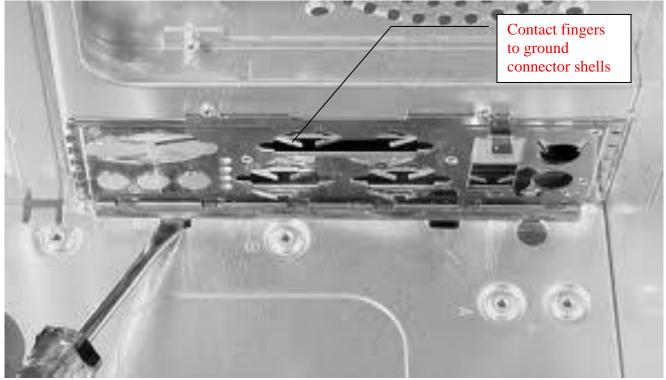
I/O Panel Interface providing chassis grounding tabs to shielded connector housings
